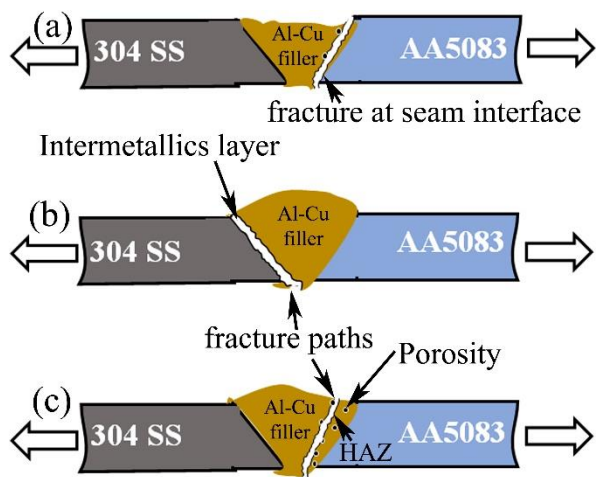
Fracture path of the joints under tensile loads at welding currents of (a) 95 A, (b) 140 A and (c) 180 A
